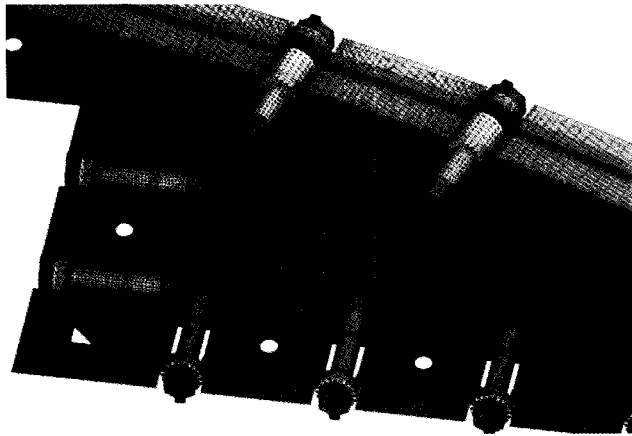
Horizontal Cut (Middle Plane of Former 2) with Bolts Represented in 3D
